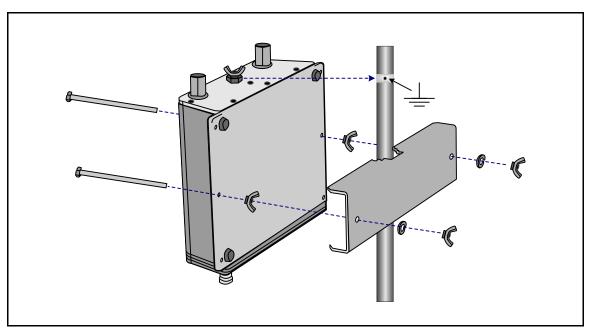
Attaching the Mast-Mounting Bracket and Grounding Stud
